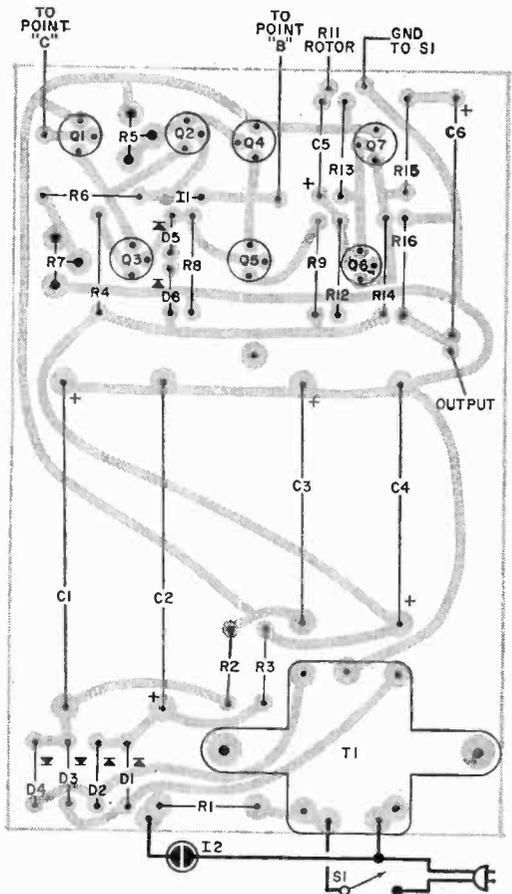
Printed circuit board speeds assembly. To make your own board, copy actual-size foil pattern.
